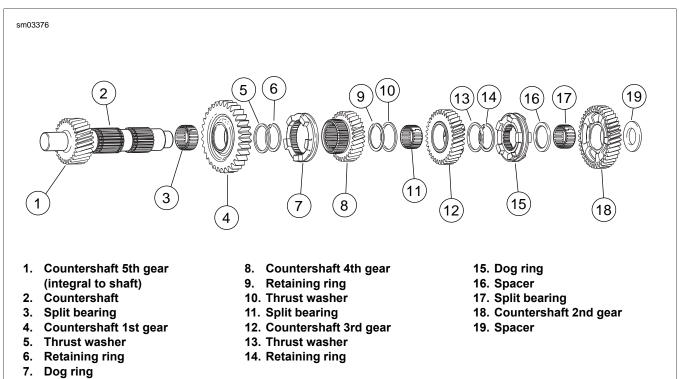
Transmission Countershaft Assembly Once Removed from Left Crankcase/Disassembly
